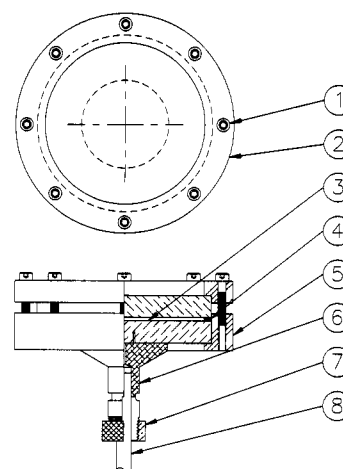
Components of centrifugal sample cell: (1) eight 6–32 stainless-steel socket head bolts; (2) phenolic flange; (3) 3-in.-diameter $\times \frac{3}{8}$ -in.-thick Pyrex disk; (4) 0.5-mm neoprene gasket; (5) phenolic flange; (6) aluminum chuck; (7) knurled brass chuck ring; and (8) 0.25-in.-diameter stainless-steel drive shaft.
